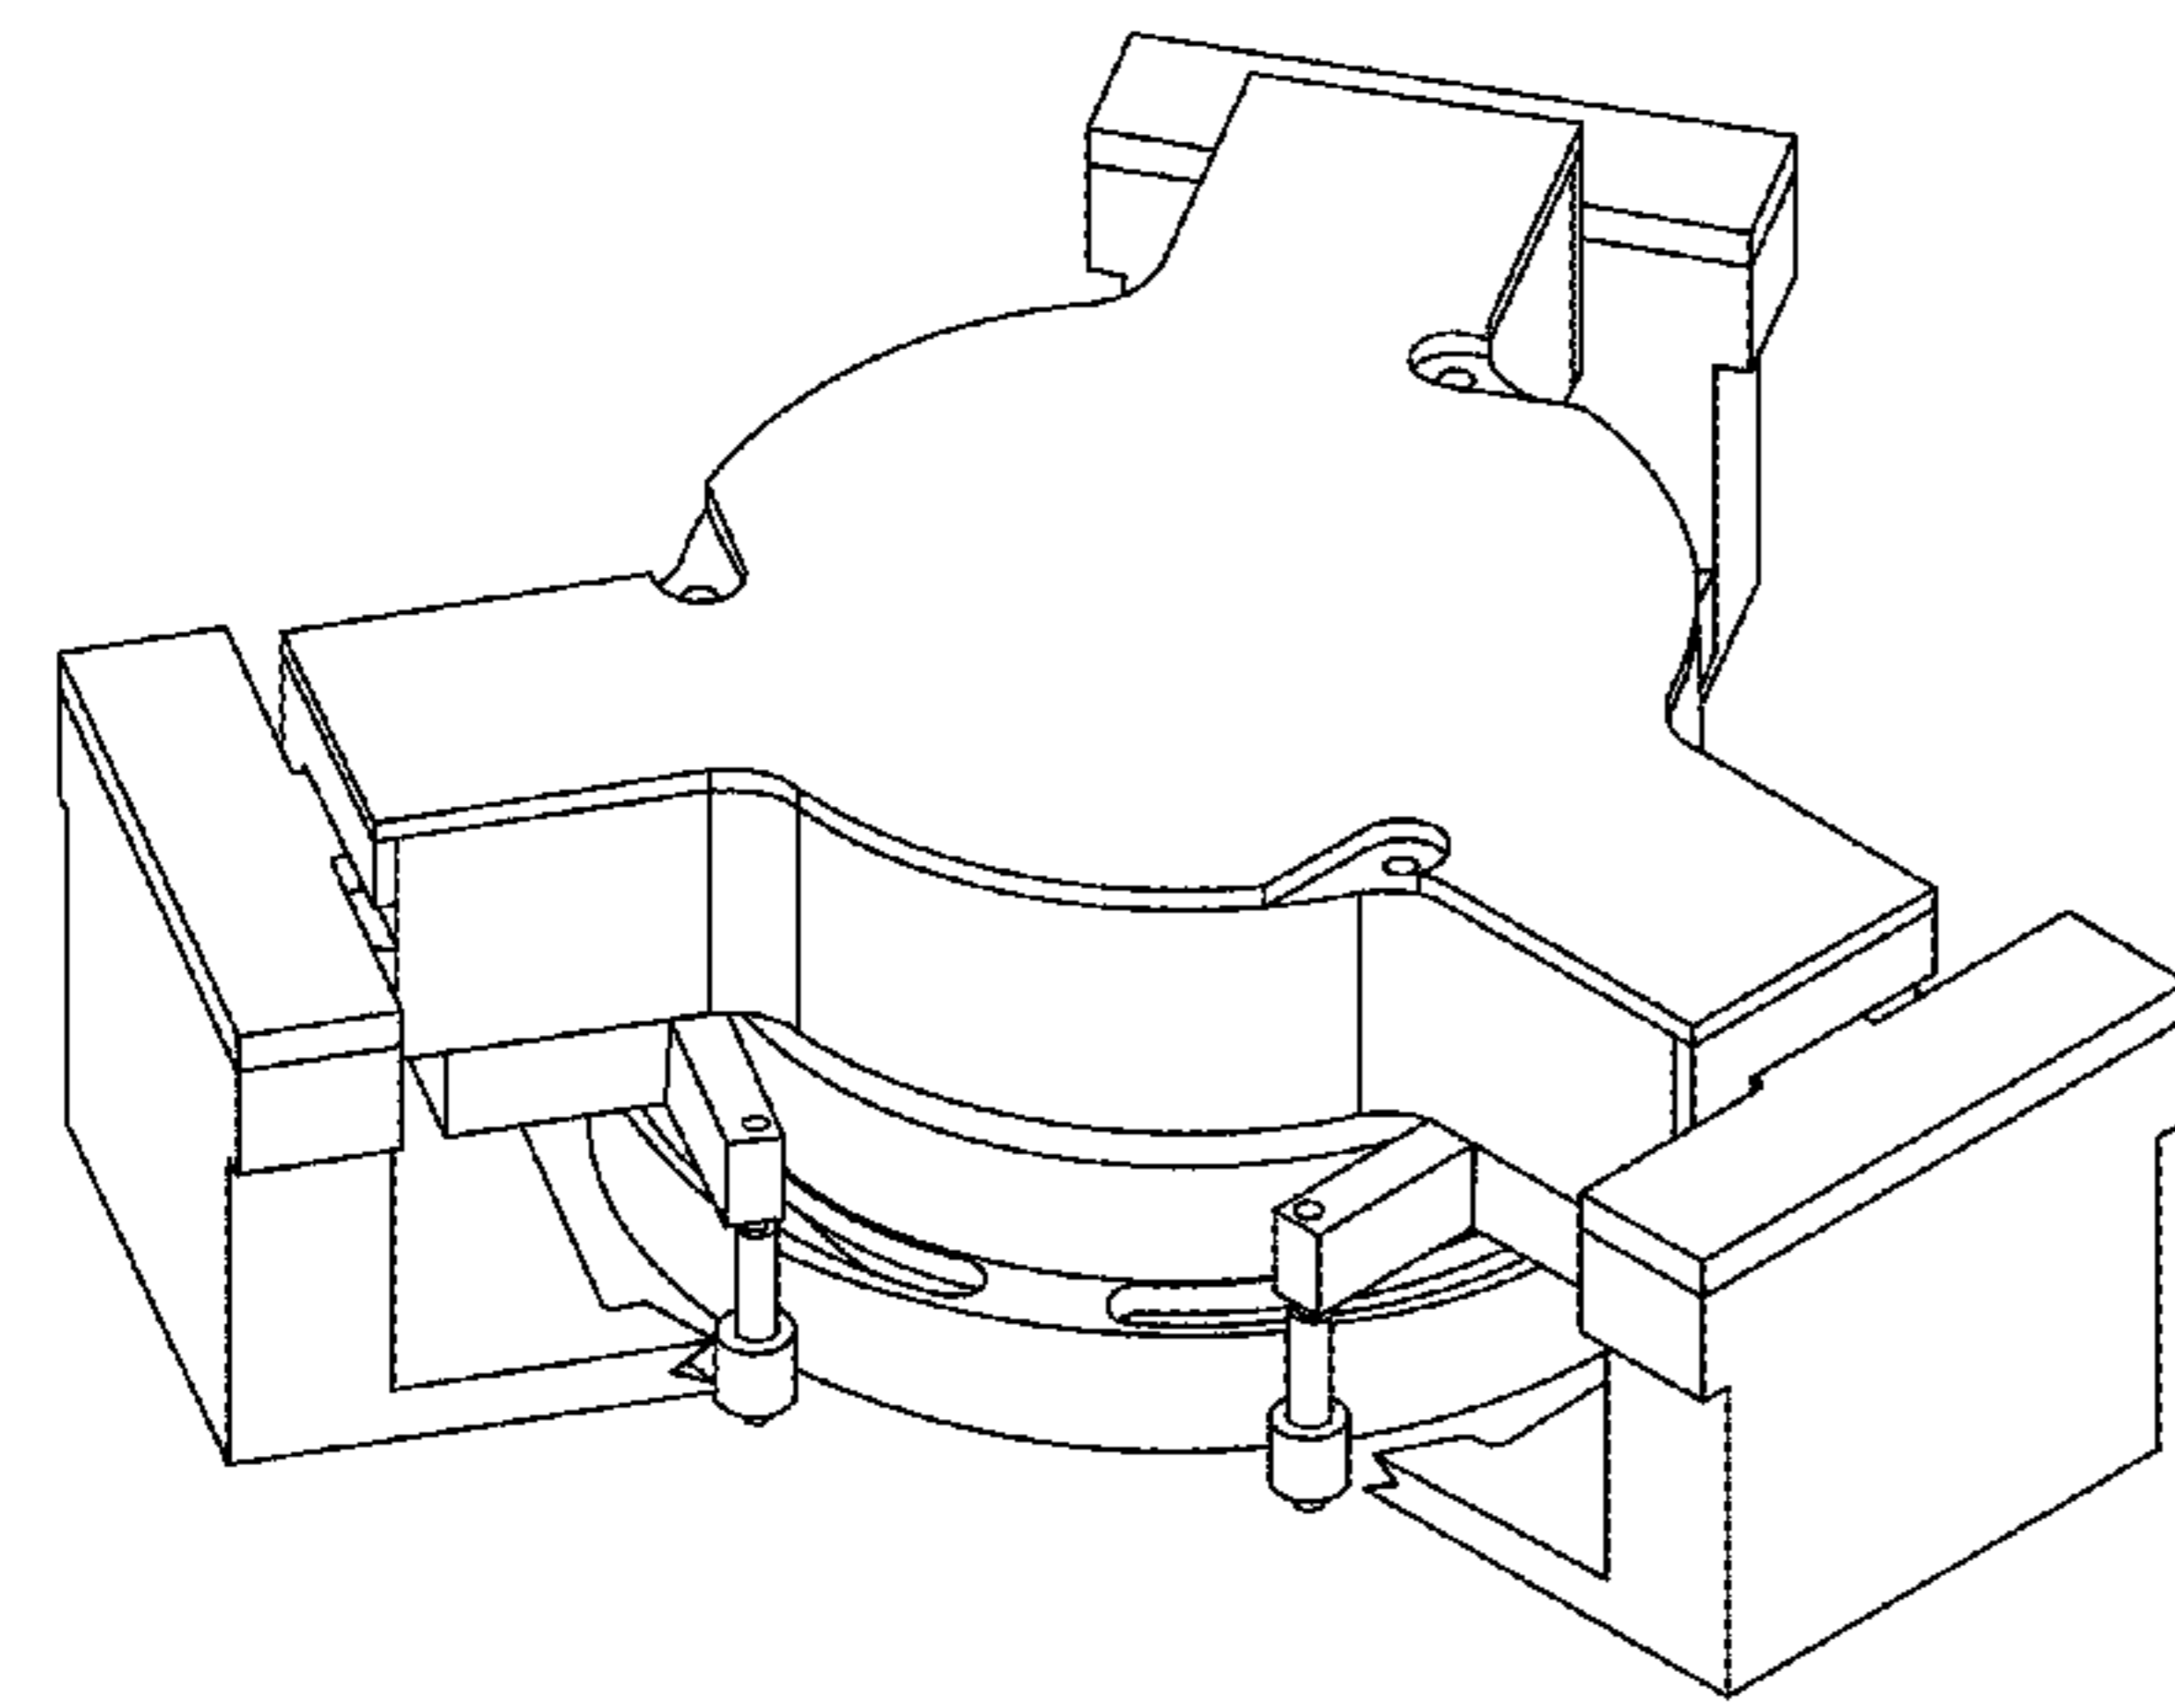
is a top view of the wafer handling assembly of FIG. 1.
